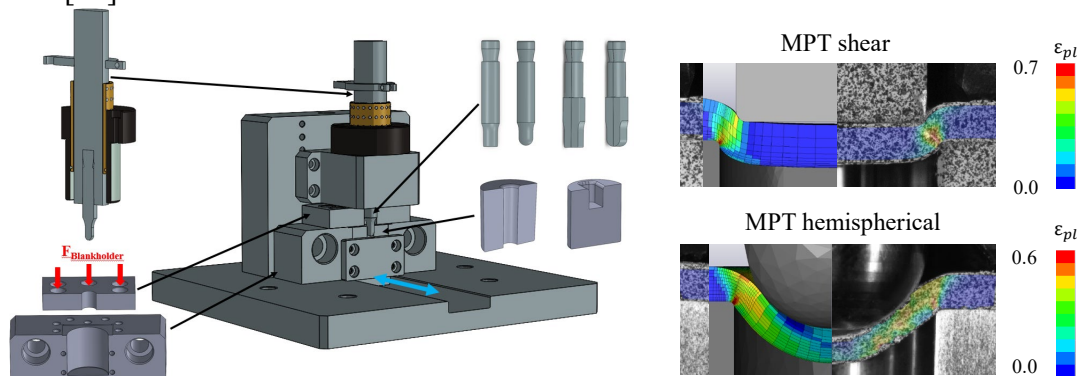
Modified punch test for identifying damage parameters in sheet metal materials
